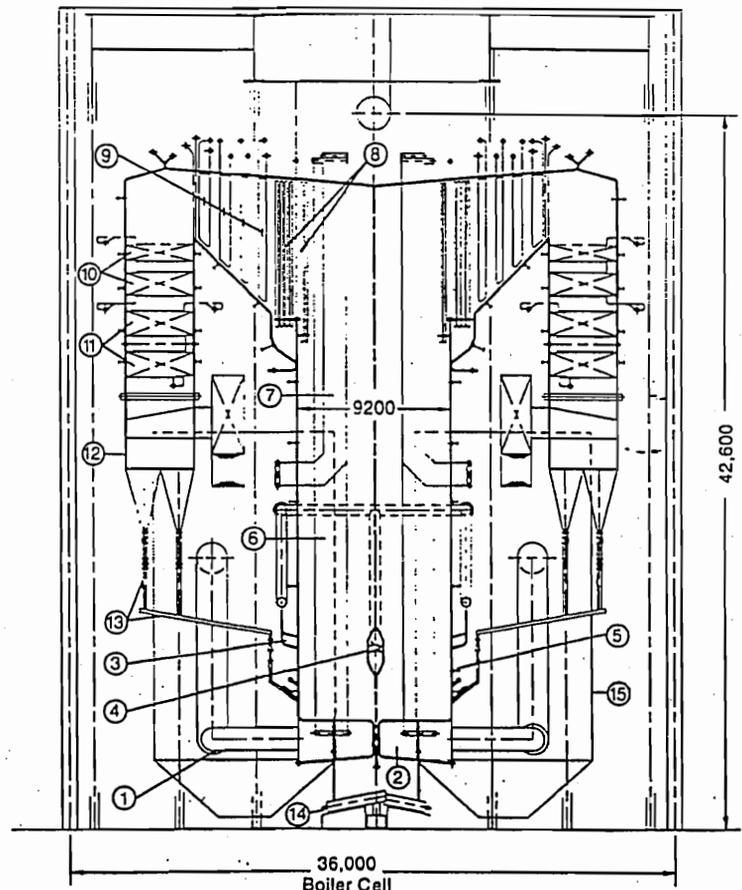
Arrangement of 670 ton/hr CFB boiler (front section view).
